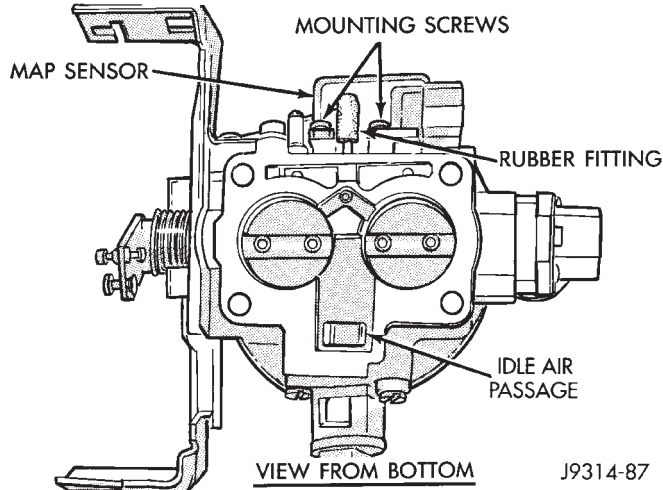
Rubber L-Shaped Fitting—MAP Sensor-to-Throttle Body
